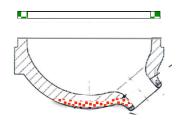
BOTTOM CHANNEL HEAD & TEST RING
